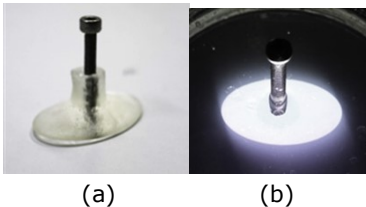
Print a screw thread (a) a physical screw is placed in the resin to create the internal structure for a thread (b) the screw can tightly fit into the thread
